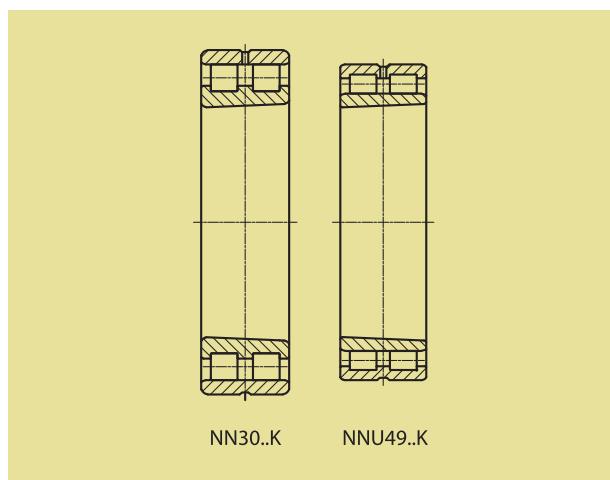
series of double-row high-precision cylindrical roller bearing
